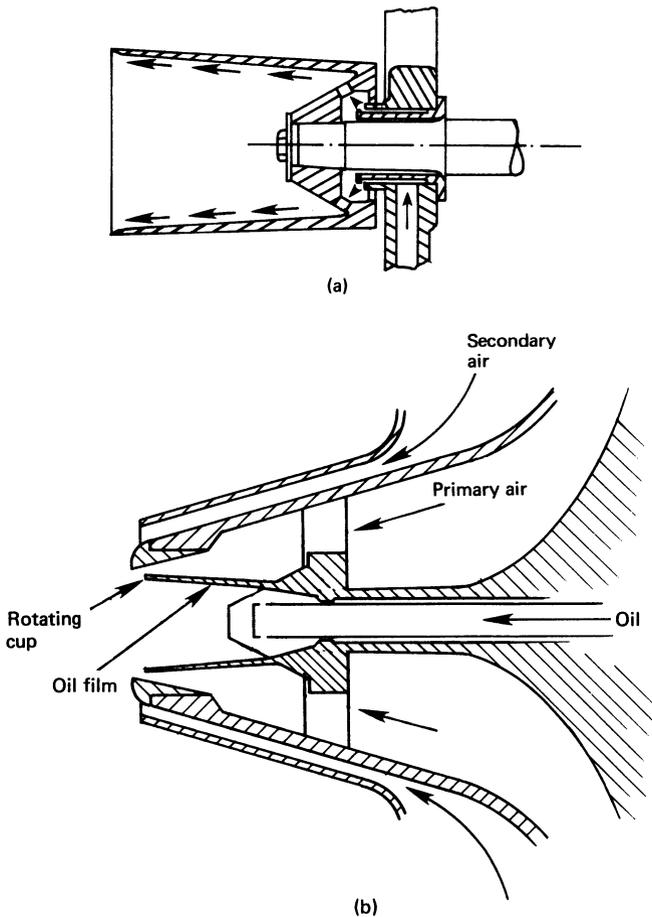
(a) Oil feed groove to rotary cup burner. (b) General view of motor driven rotary cup burner
